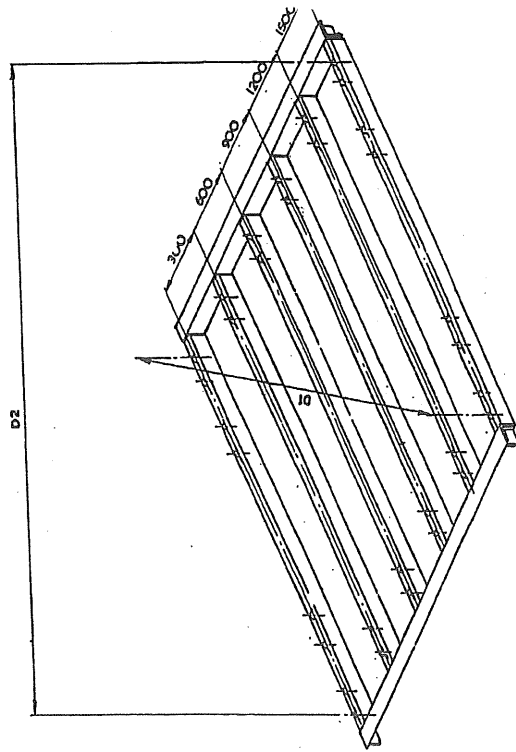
DIMENSIONAL CHECK ON FRAME OF EMITTING SYSTEM - TOP (400 MM WIDE CE PLATE)
